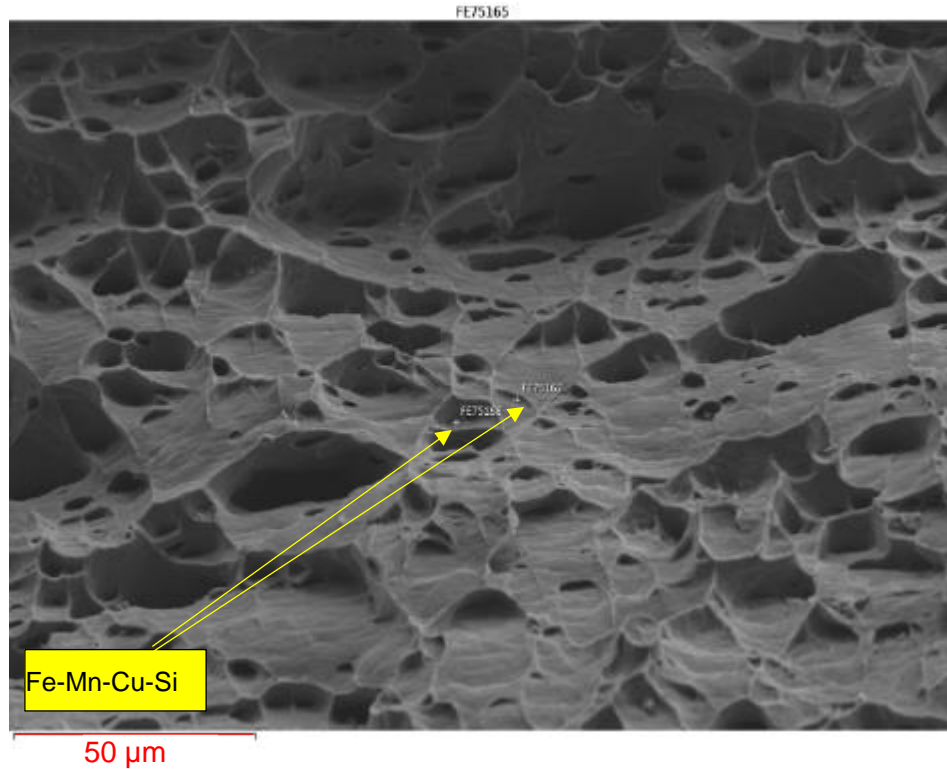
SEM image of fracture surface of equi-biaxial bulge sample of HRC6111-T82 sheet fractured at 300°C.
